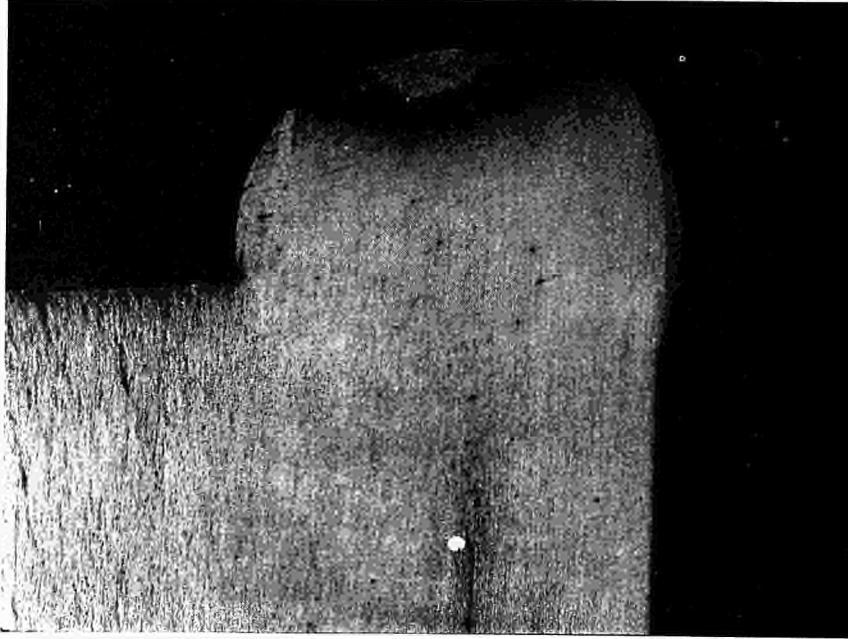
End-plug type b - welding of S.A.P.
